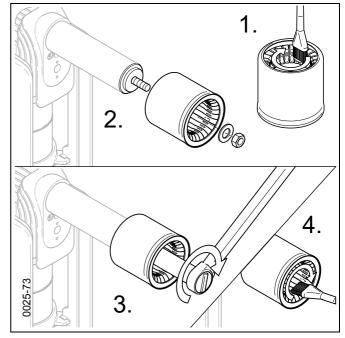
Attaching contact arms – example with \emptyset 60 mm
